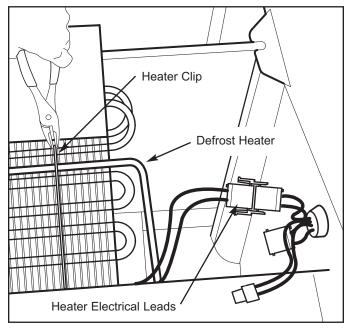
700BCI-3 & 700BFI-3 Defrost Heater Removal
